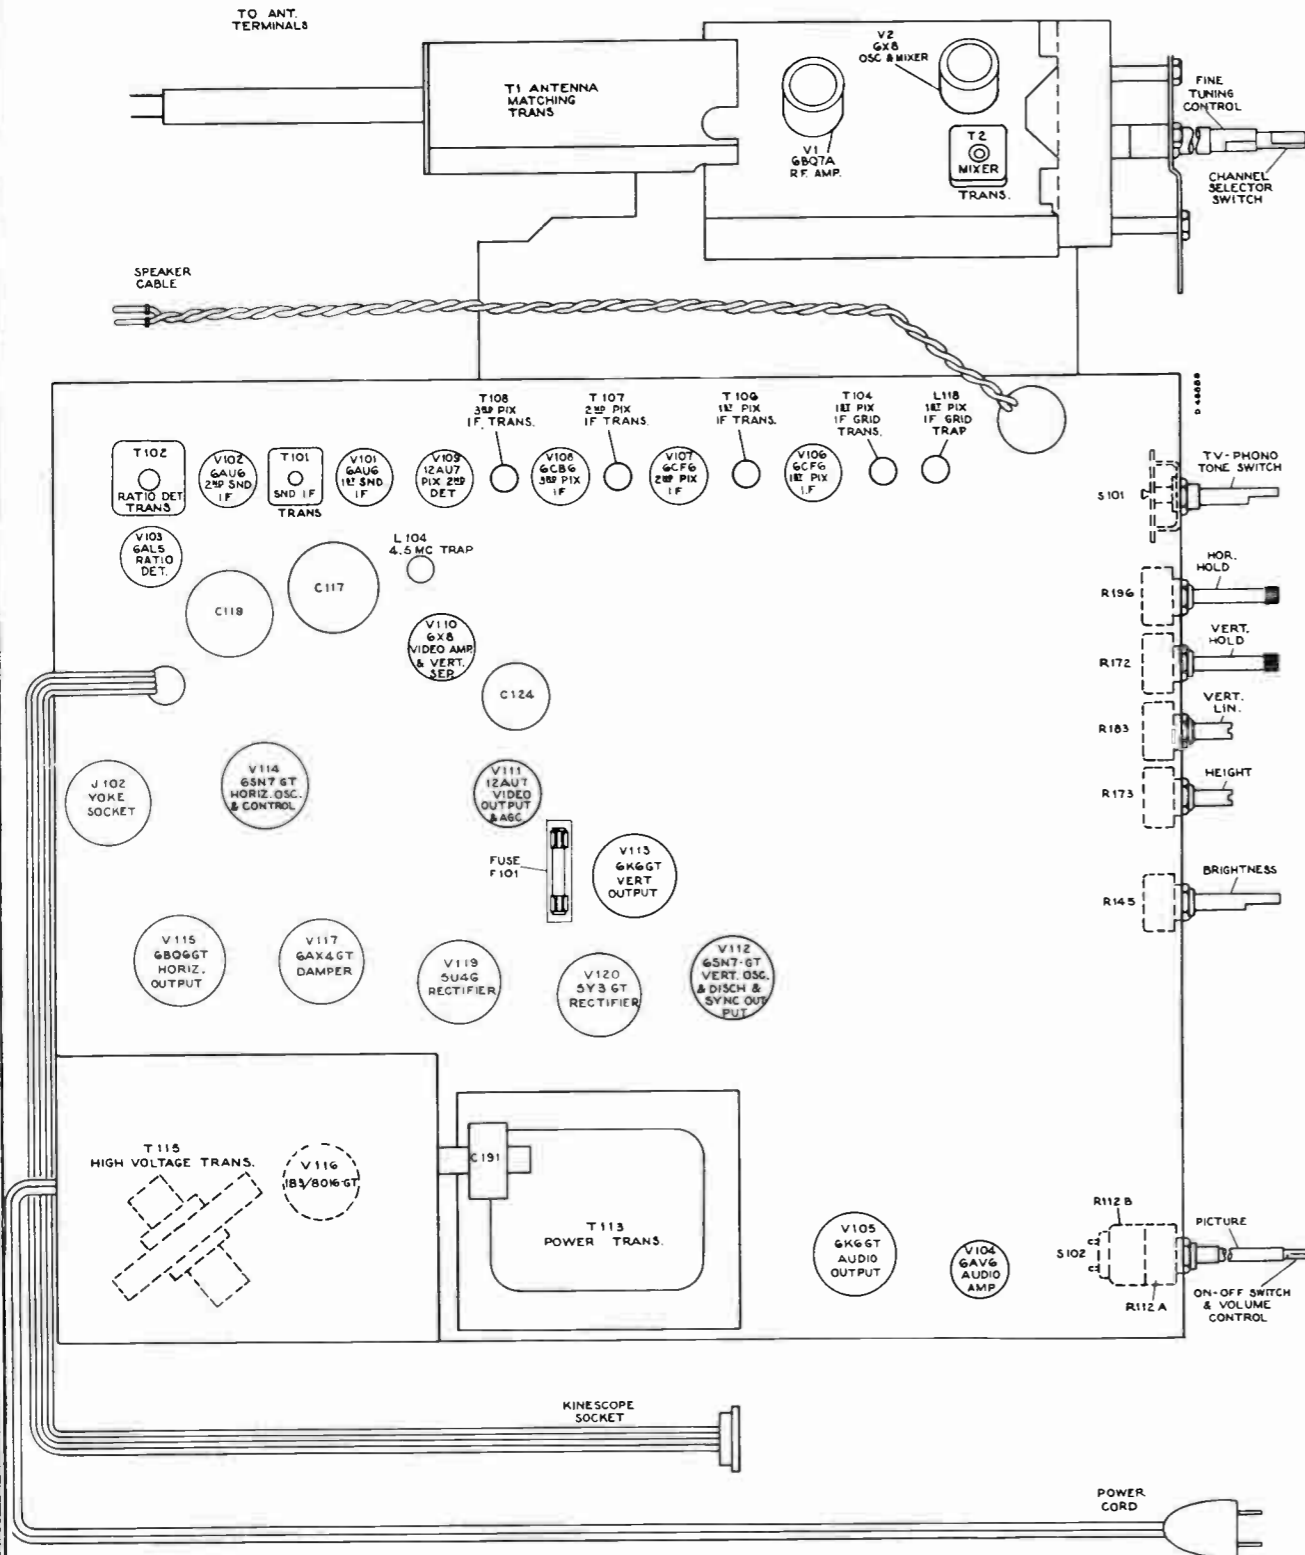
Chassis Top View (shown with KRK29 Tuner)
